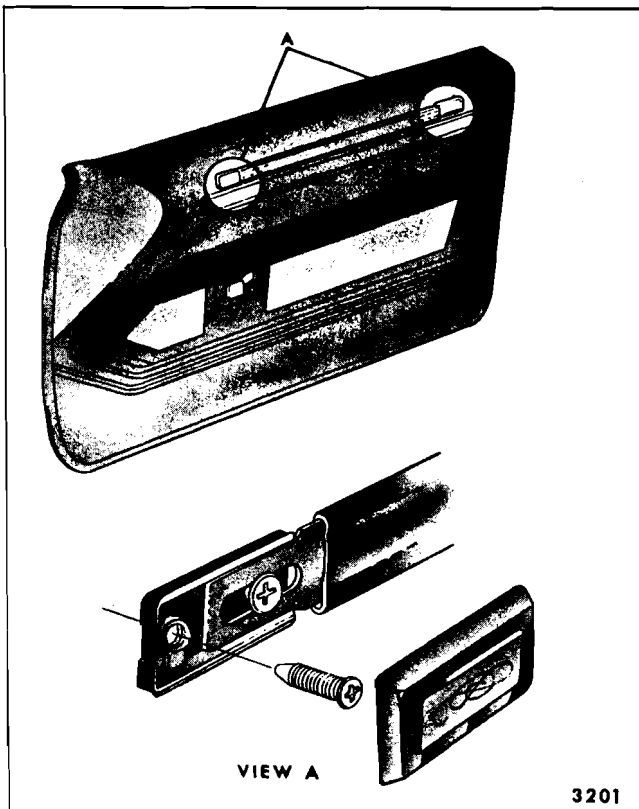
Door Pull Handle Attachment - Cadillac Styles
